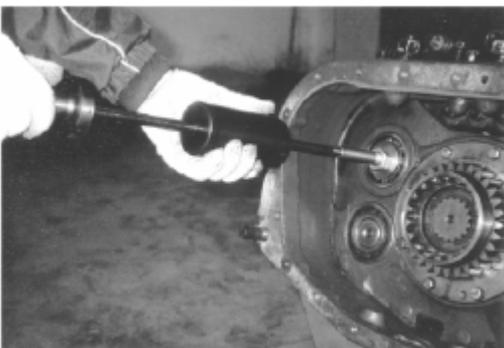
Pull Out The Bearing by Using Reverse Shaft Extractor
